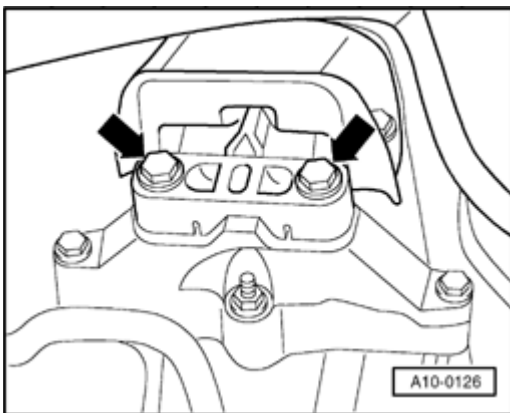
Locating Engine Carrier Bolts (Transmission Side)
